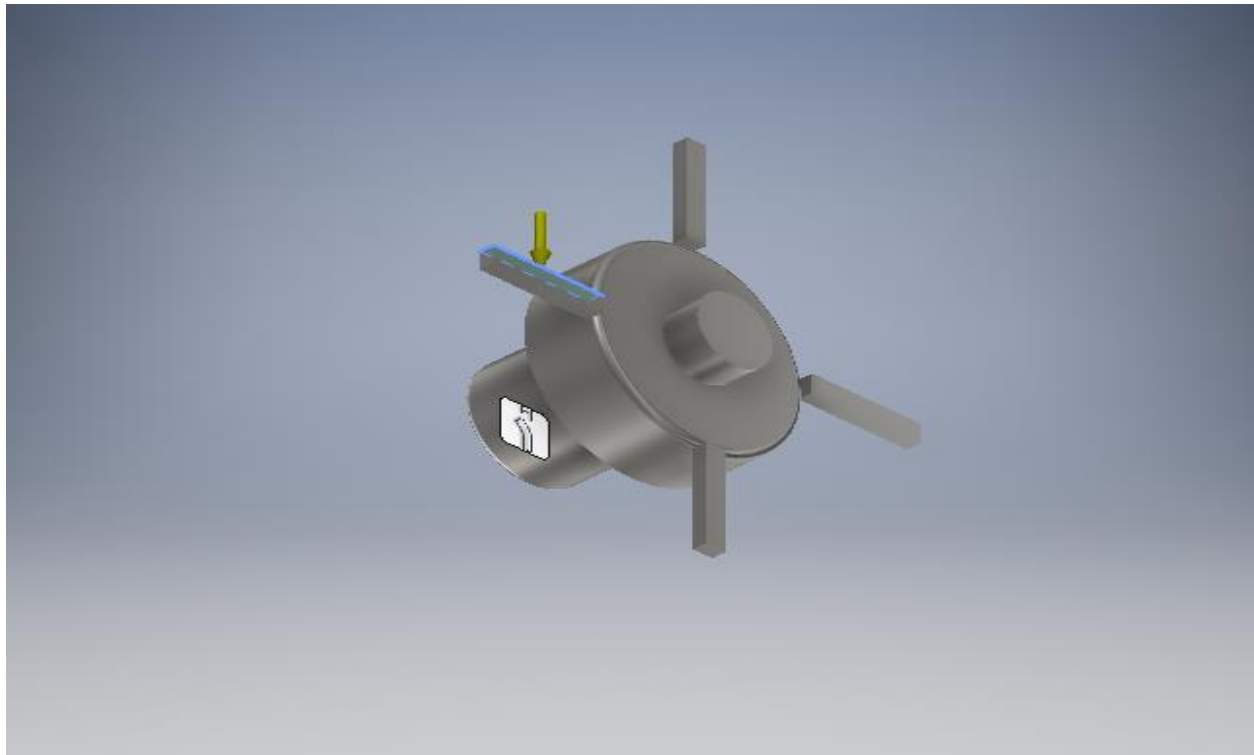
Wind Turbine Rotor, Blade, Load and Constraint
